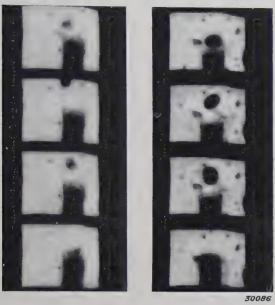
X-ray photograph of the transfer of drops between welding rod and work. The arc is very long. In contrast to fig. 4 where the drops touch the piece of work and then let loose from the welding rod, the drops are in this case "shot away" from the welding rod.
